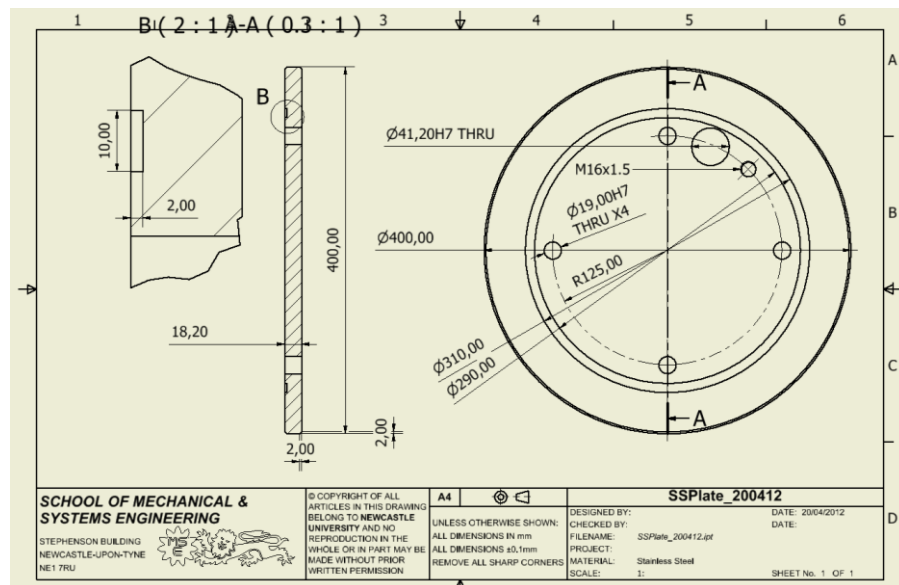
Engineering drawing for vacuum chamber base plate, as fabricated. Grounding connections are not shown for clarity.
